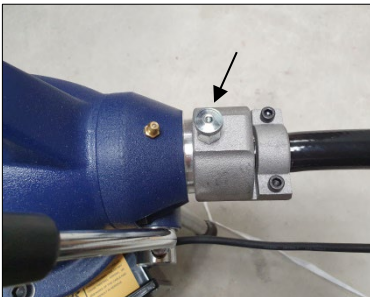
Protection hose fixed above cable, locking bolt marked by an arrow
